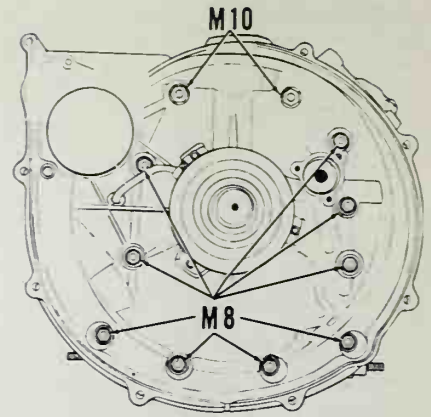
View showing location of M8 and M10 nuts in flywheel crankcase section.
